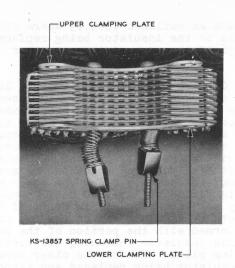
Bank With KS-13857 Spring Clamp Pins in Place
